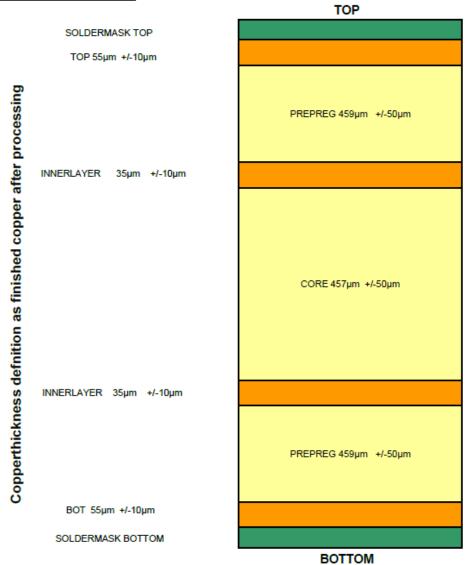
Recommended PCB stack-up information for use while integrating LNADVW module.
